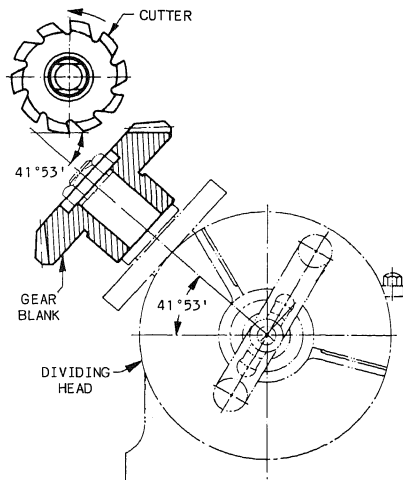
Bevel gear set to the cutting angle by swiveling the dividing head in the vertical plane.
